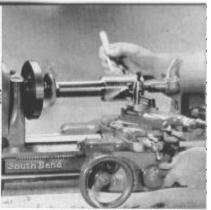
Cutting a Large Screw Thread on a Shaft,
